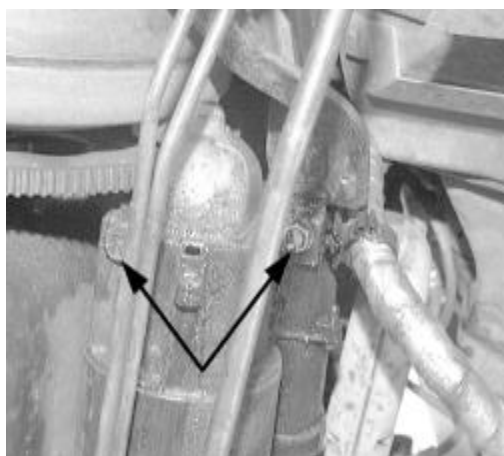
The starter is secured with 2 mounting bolts
